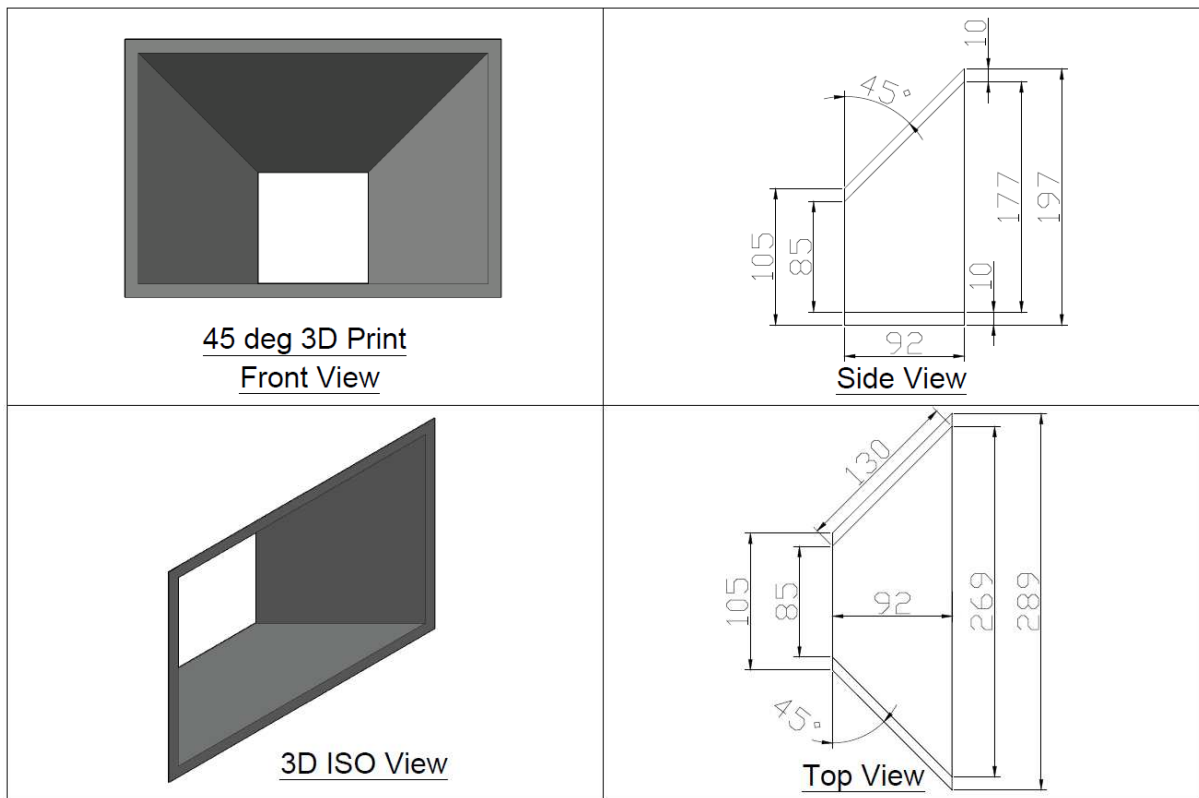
Drawing of the 45 degree model headwall / wingwall model
